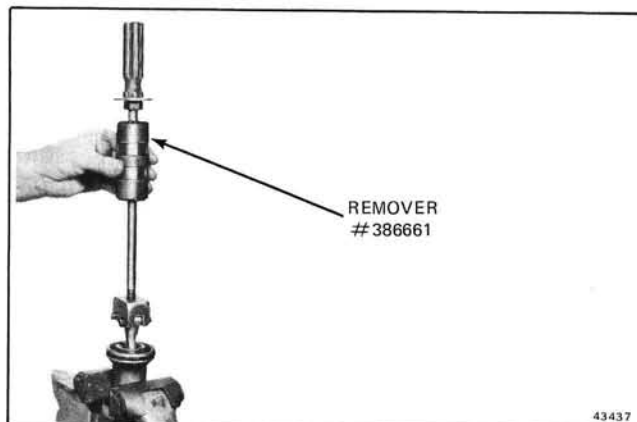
Removing Gearcase Bearing Housing Front Bearing
